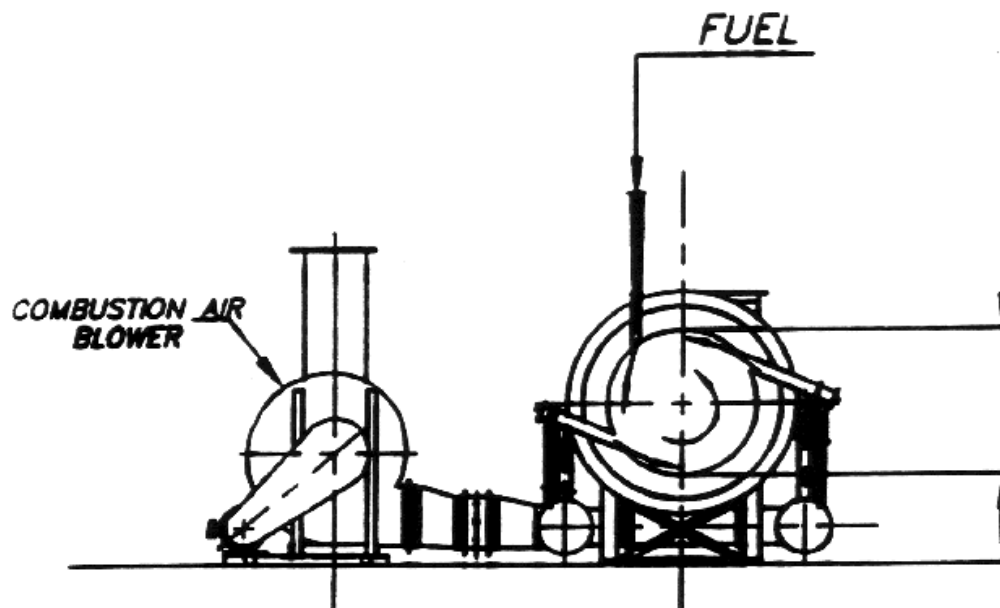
Manufacturer's drawing of the cyclonic wood dust burner primary chamber of the type used in the McConnell Model 48 burner. The dimension between the arrows at the right is 48 inches.
